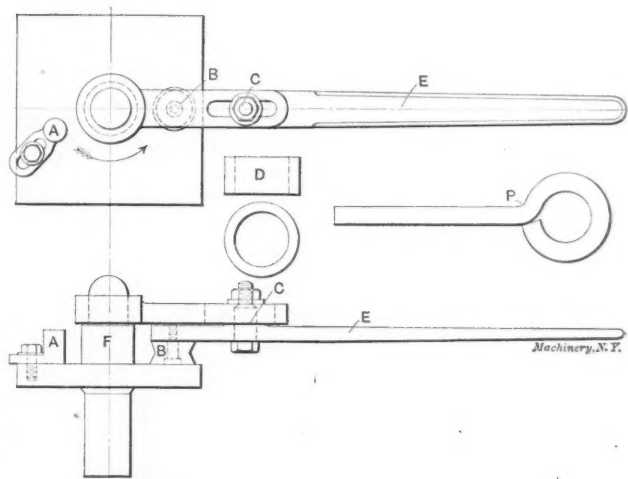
Tool for Forging Open Eyebolts or Hooks.
